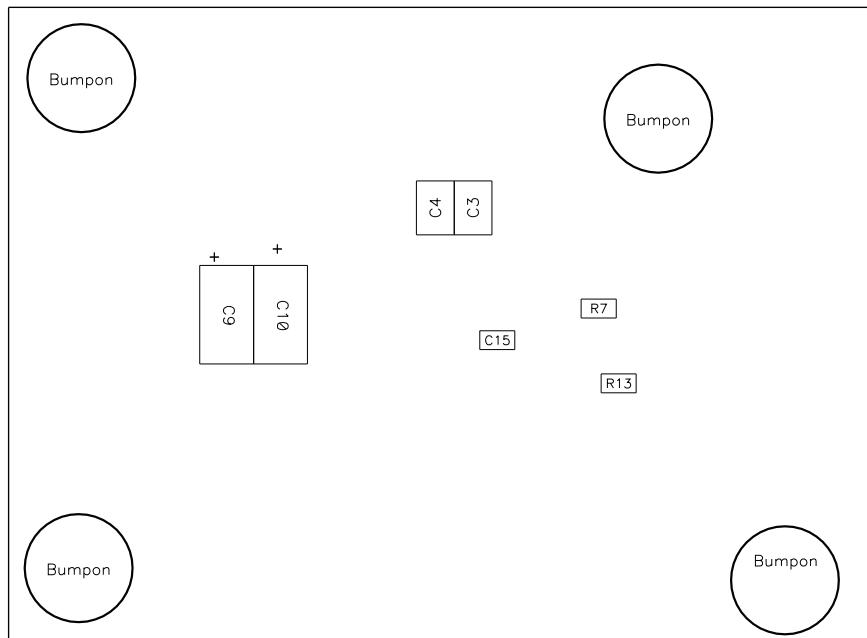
TPS51916EVM-746 Bottom Assembly Drawing
